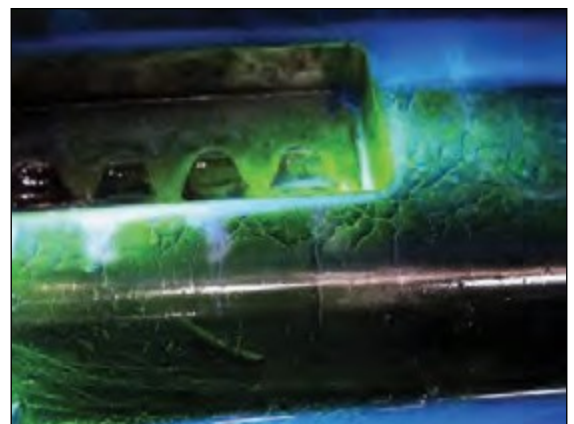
Thermal shock cracks on the surface of a die casting die, visualized in the magnetic particle test under UV-light
